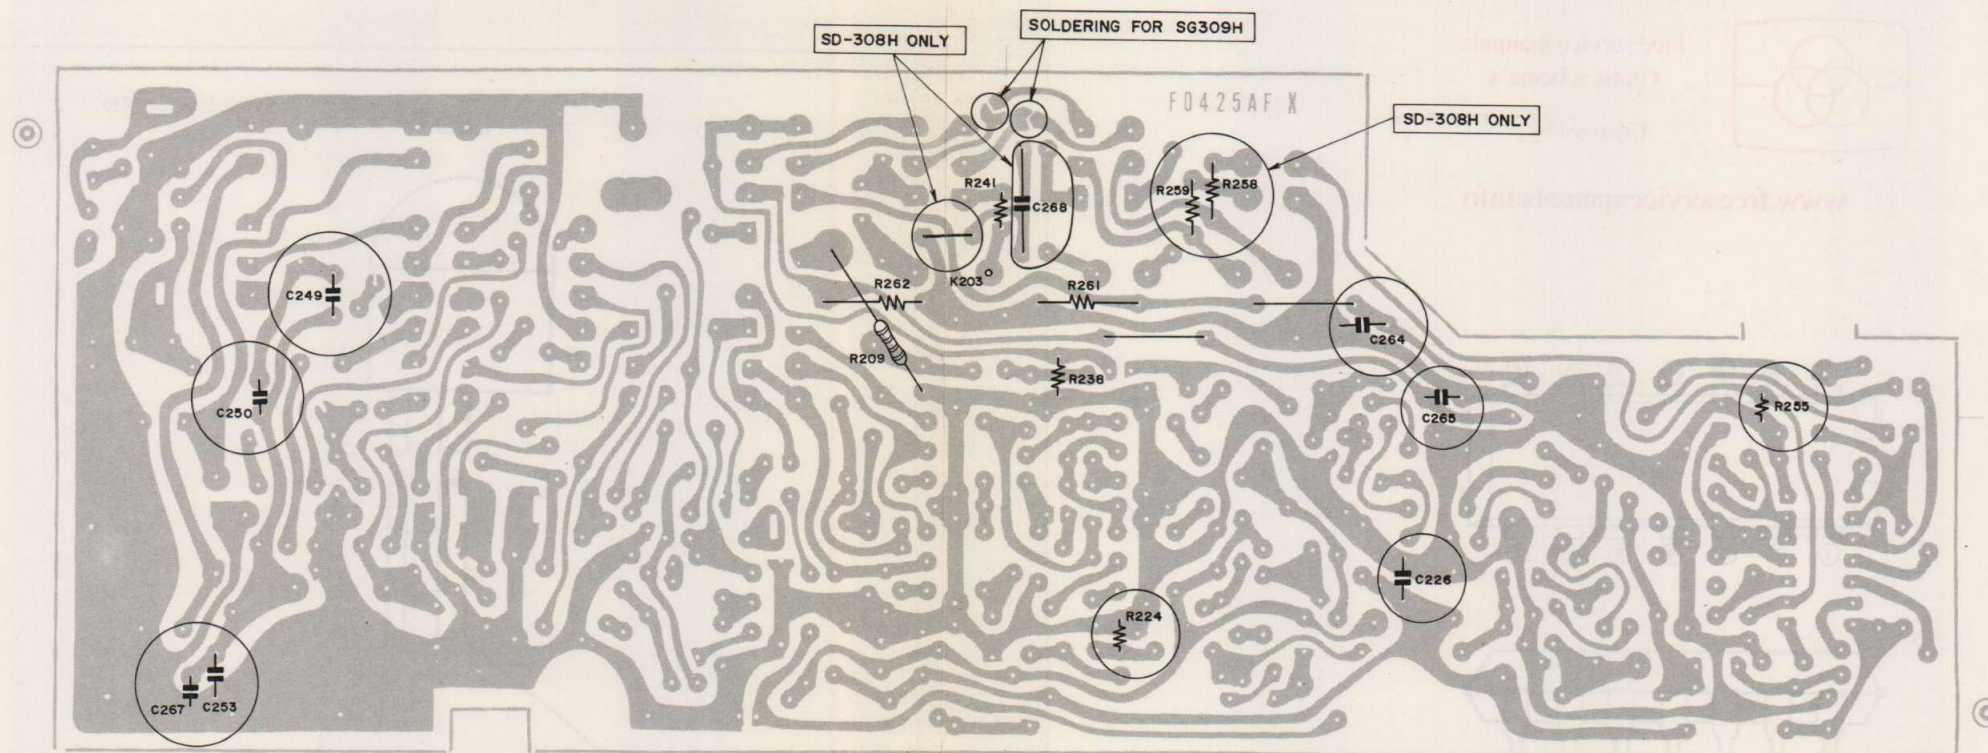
PARTS LAYOUT ON NEW TUNER AMP. BOARD
